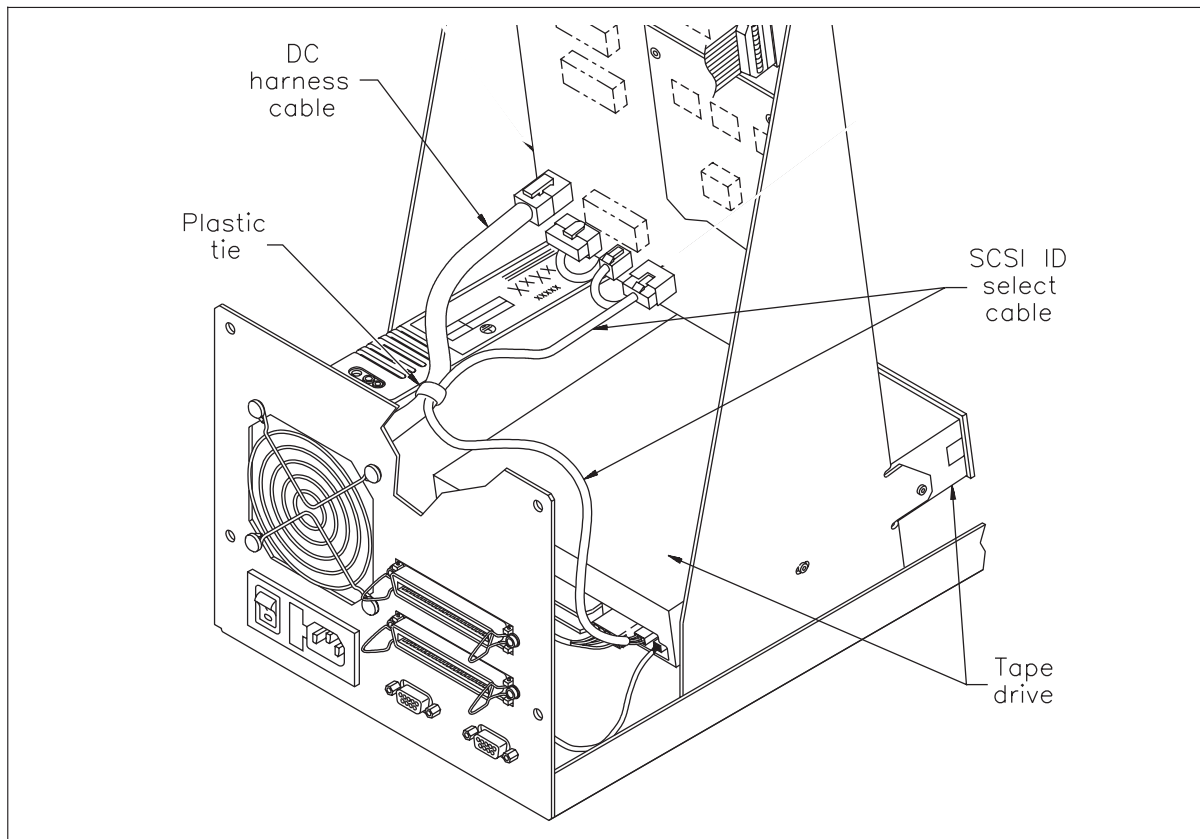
Detaching the DC harness cable from the SCSI ID select cable
